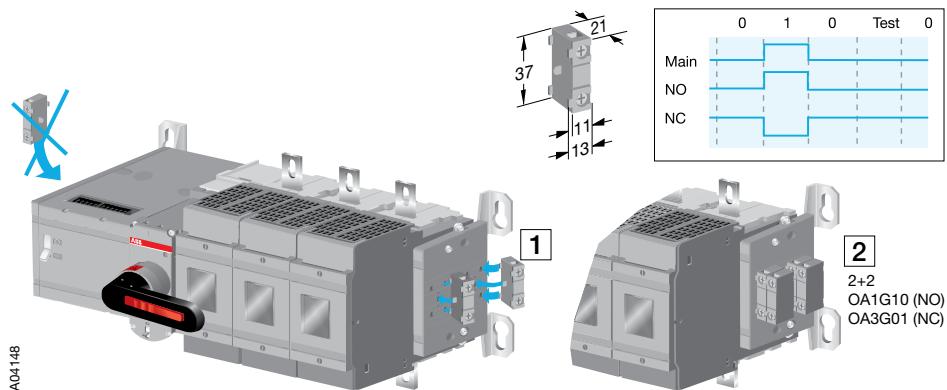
Mounting of auxiliary contacts, type OA_ on the right side of the switch fuse
